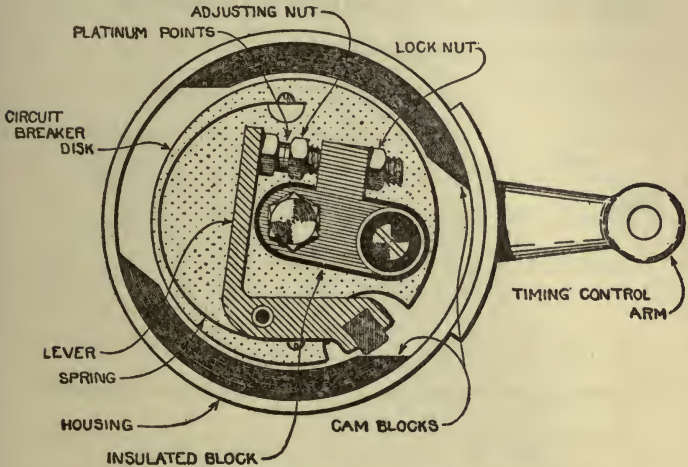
“BOSCH” CIRCUIT BREAKER
